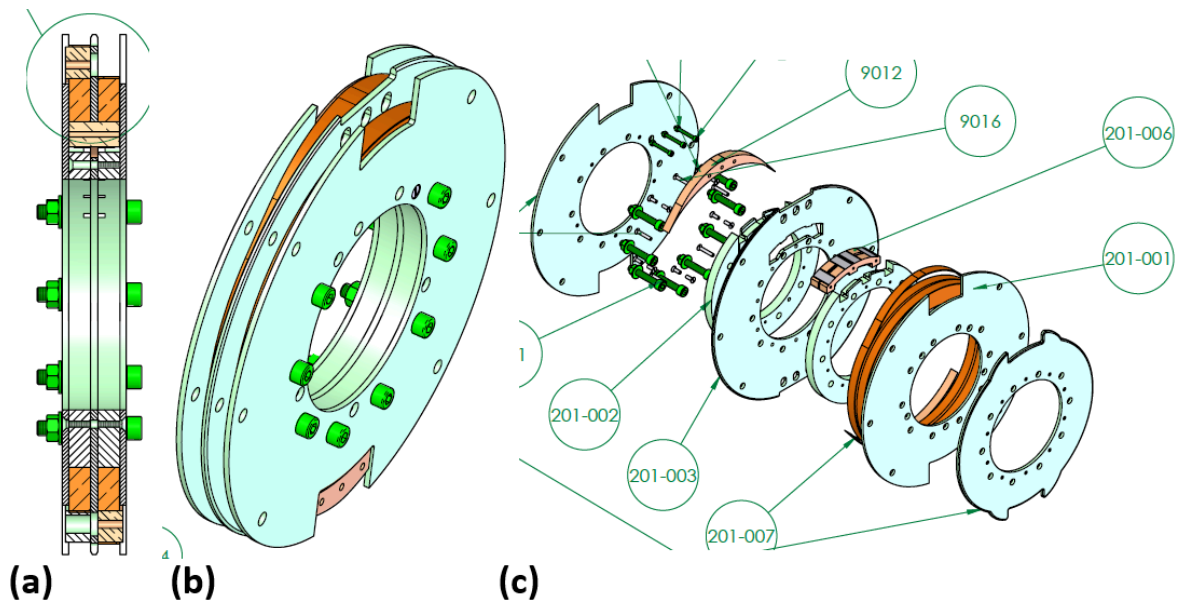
a) Sectional view of a double pancake. b) Drawing view of a double pancake. c) Exploded view of a double pancake. The internal contact (201-006) is fitted in the slot of the central flange (201-003) and blocked by the 2 mandrels (201-002). When the double pancake is stacked with other ones to make the SMES, one of the two external flanges (201-001) is removed. The flange at the forefront is only used during the winding of the double pancake.
